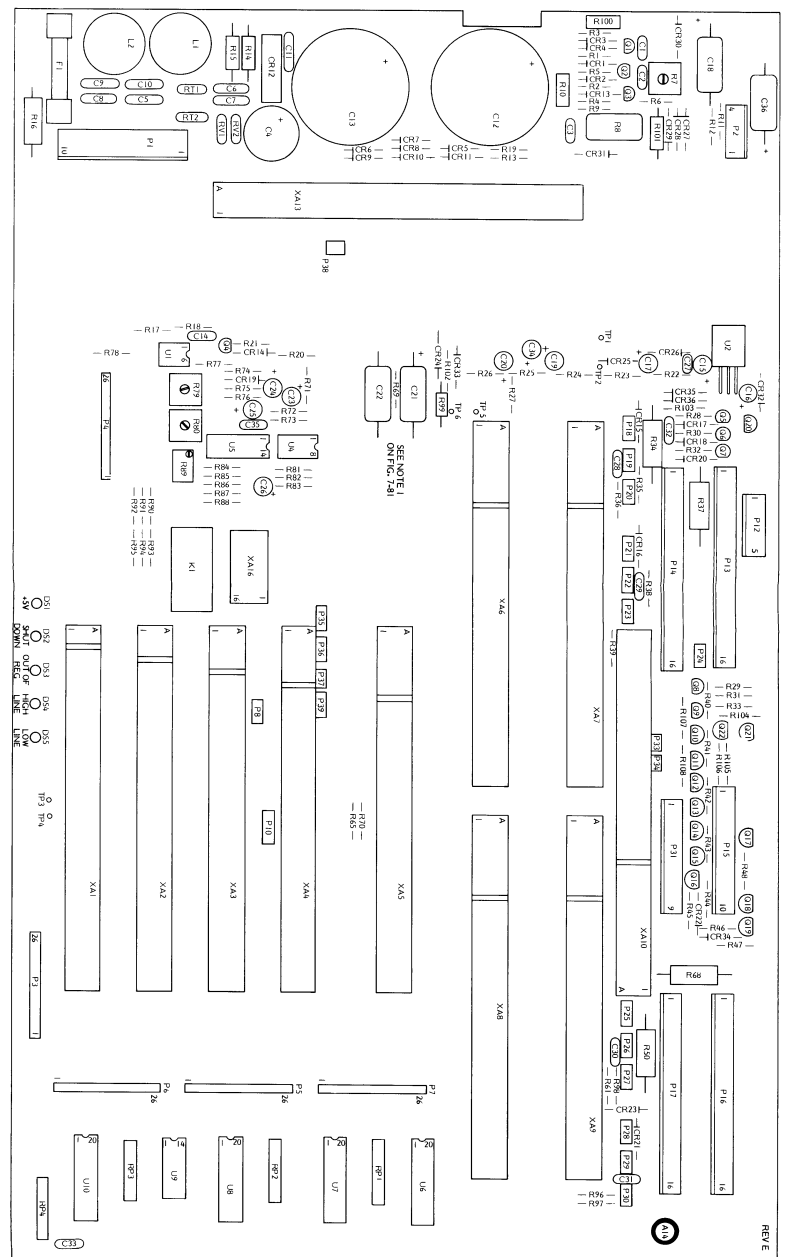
A14 Motherboard PCB Parts Locator Diagram
